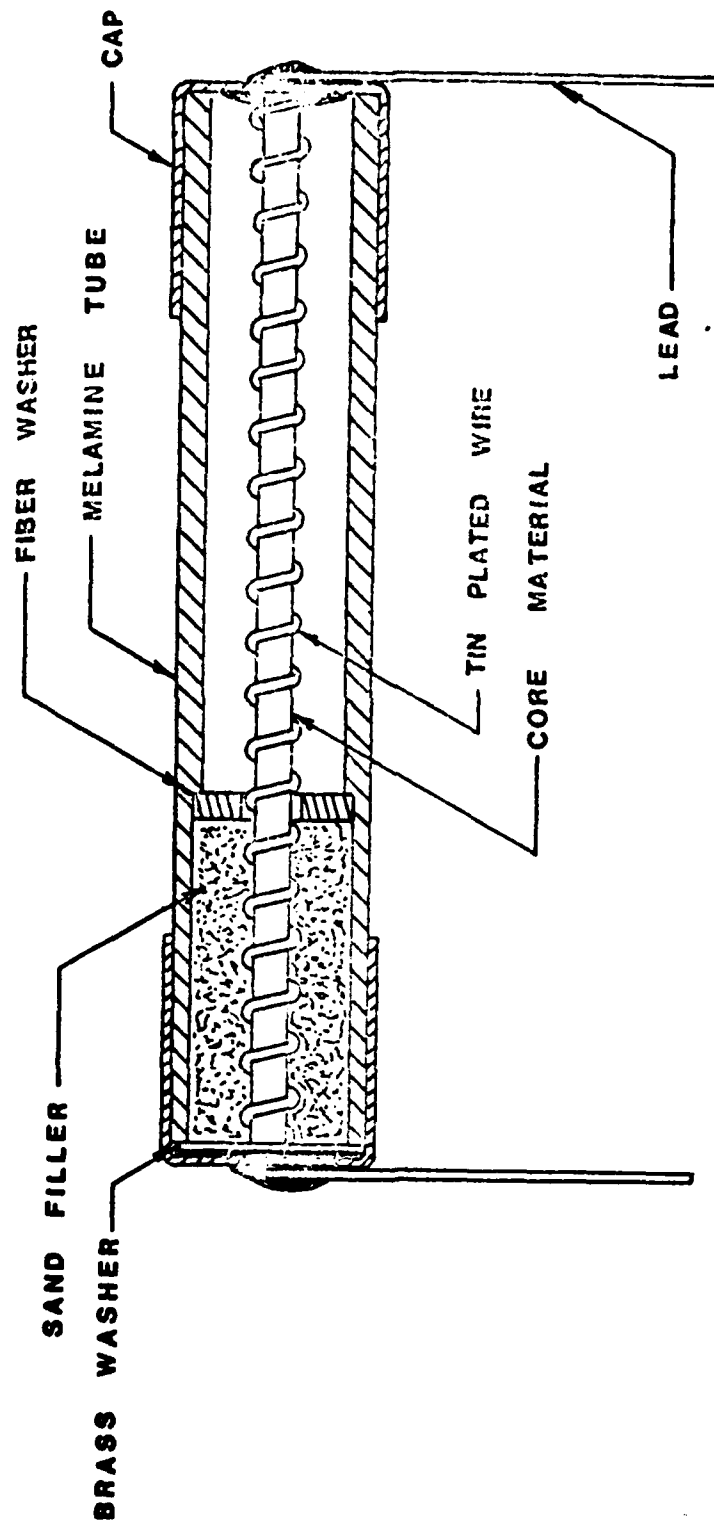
PRELIMINARY COIL WIRE DESIGN FOR 2-5A
